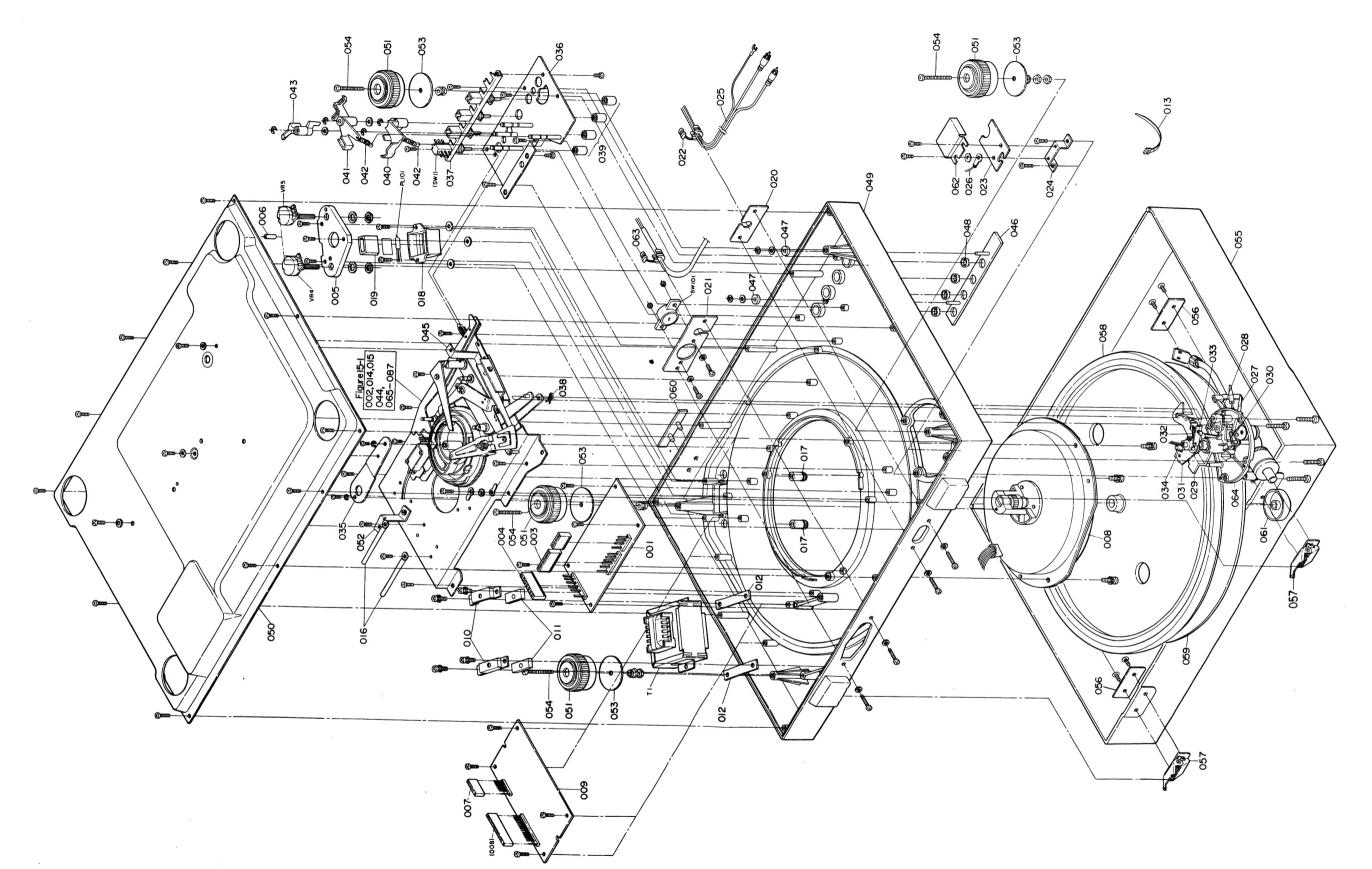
PLAYER EXPLODED VIEW (Cabinet)
